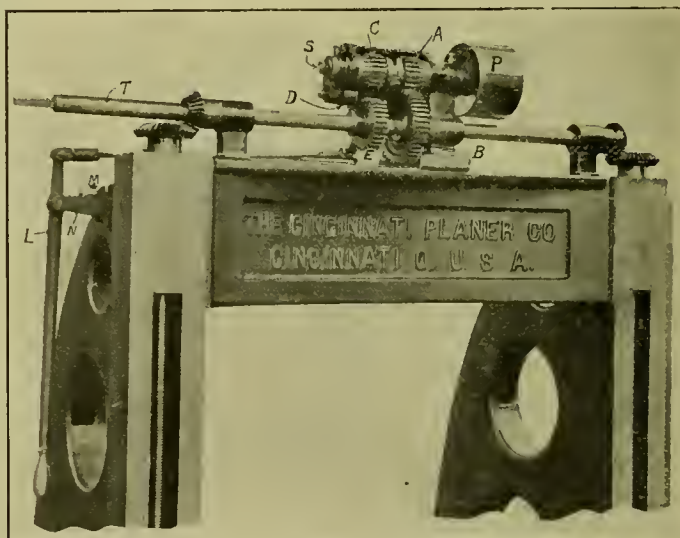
ARRANGEMENT OF THE INDIVIDUAL MOTOR DRIVE FOR OPERATING THE CROSS RAIL, RAISING AND LOWERING MECHANISM. THE BORING MILL.
